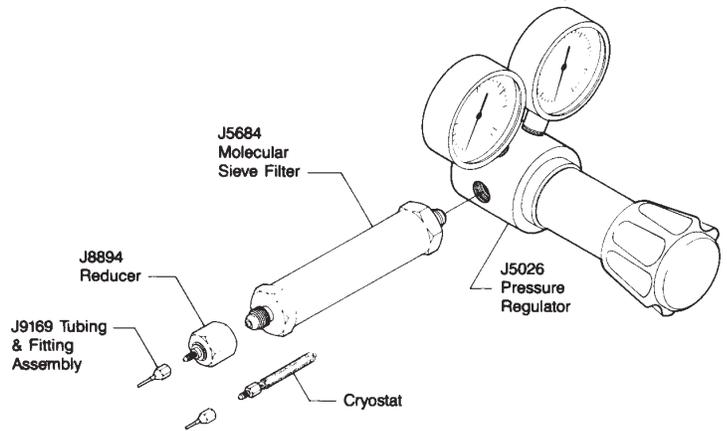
Complete High-Pressure Gas Supply Assembly for Joule-Thomson Cryostat Operation
